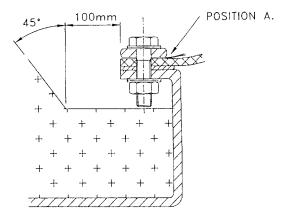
Heat damage at mounting flange. (Source: Townson Expansion Joints.)
